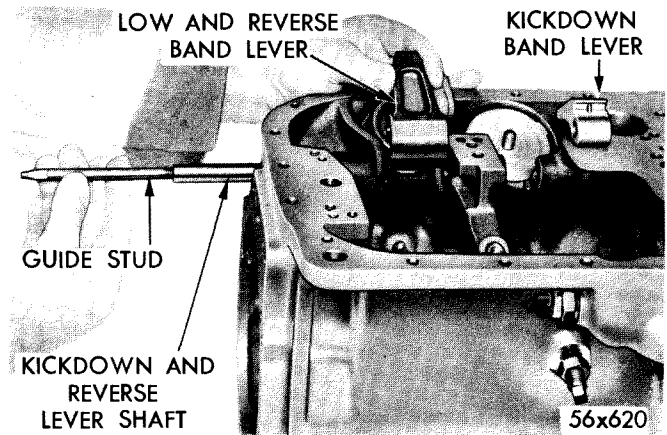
Removal and Installation of Kickdown and Reverse Lever Shaft
